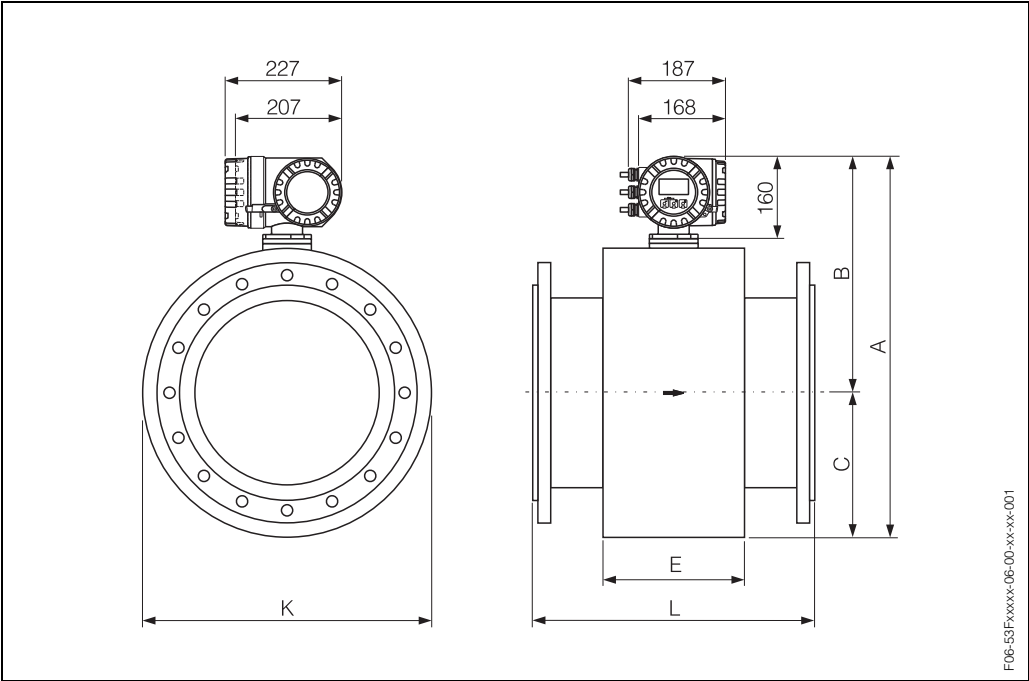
Dimensions Promag W / DN ≥ 350 (compact version)
